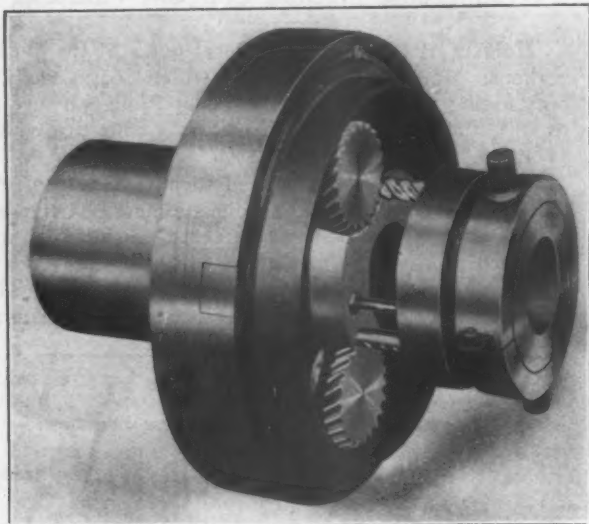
A New Type of Friction Clutch Made by the Hilliard & Richards Clutch & Machinery Company, Elmira, N. Y.
